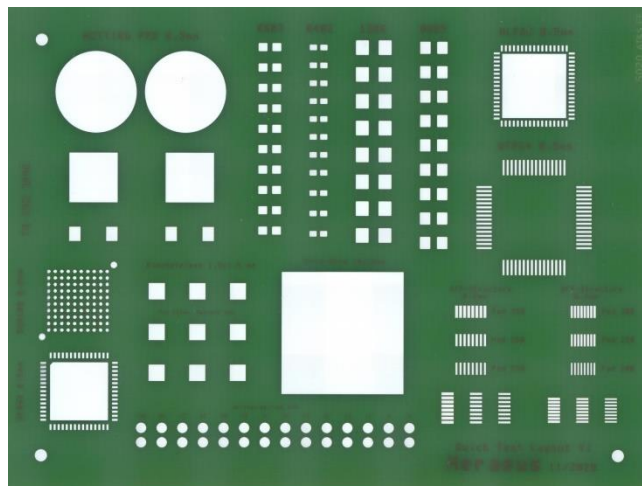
Heraeus Quick Test Layout (QTL) board.
